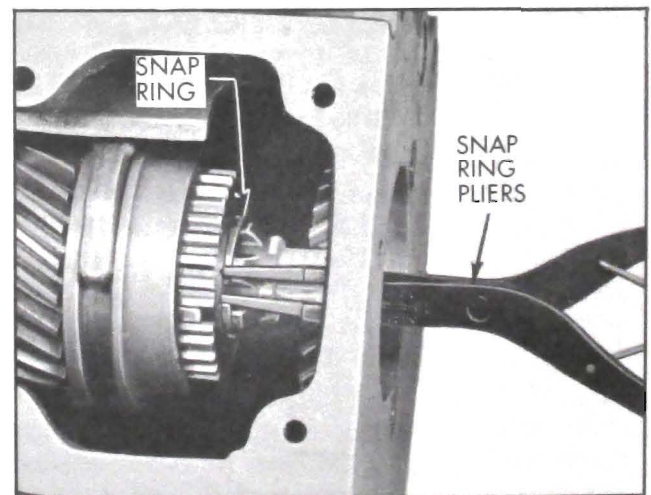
Removing Snap Ring from Front of Main Shaft
